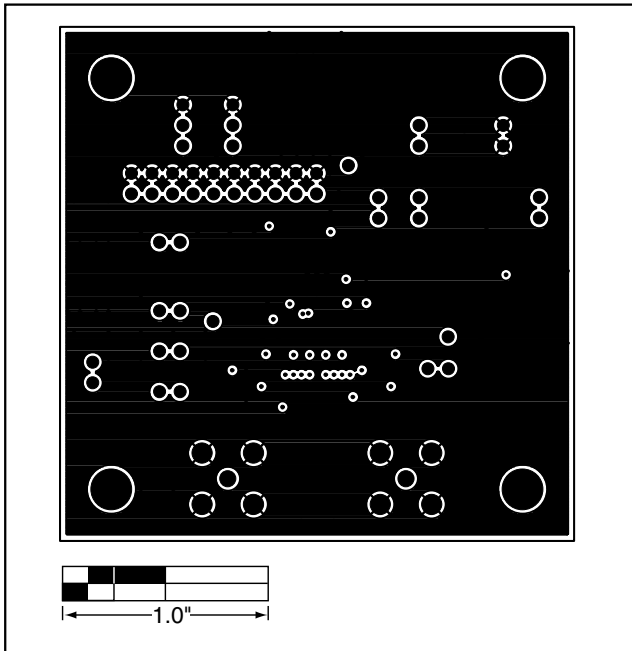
MAX2394/MAX2395 EV Kits PC Board Layout—Inner Layer 3
